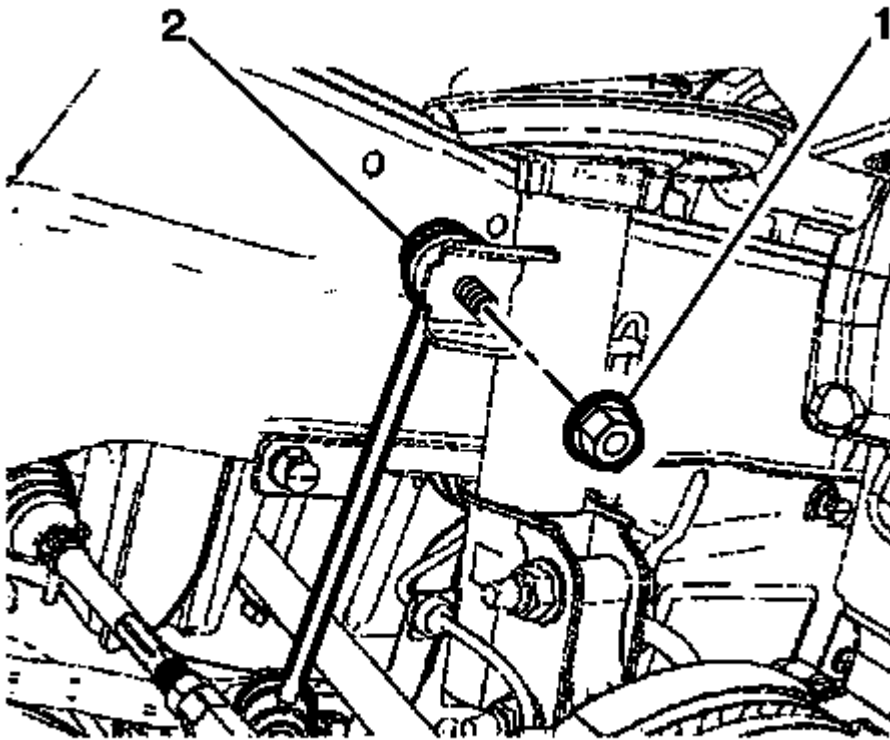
Front Upper Stabilizer Shaft Link Nut
